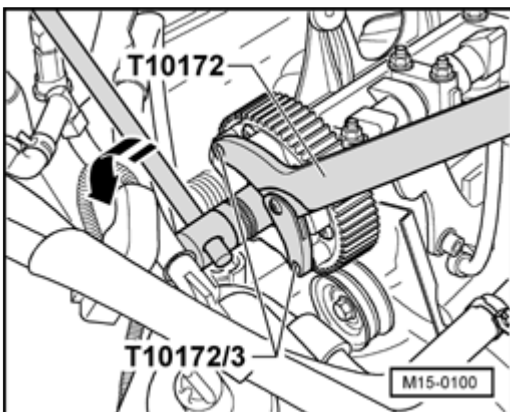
Loosening Camshaft Bolt Using Counterhold Tool T10172 With Pin T10172/3
